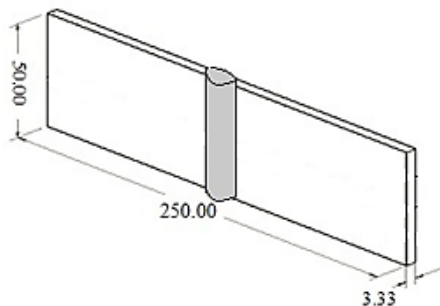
Diagram of welded plates (dimensions in mm).
